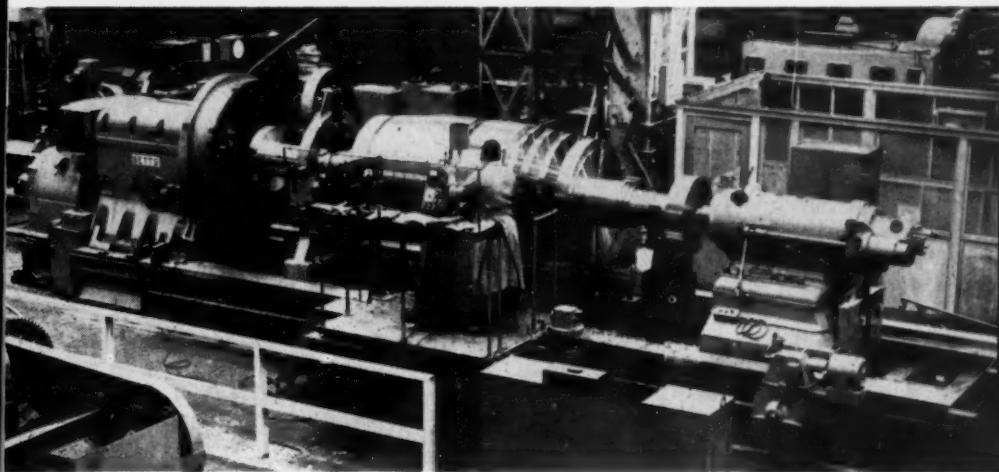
This huge turbine rotor, shown here being grooved with the aid of Carbolyt disposable type inserts, weighs approximately 34 tons and is 19 feet between lathe centers.
